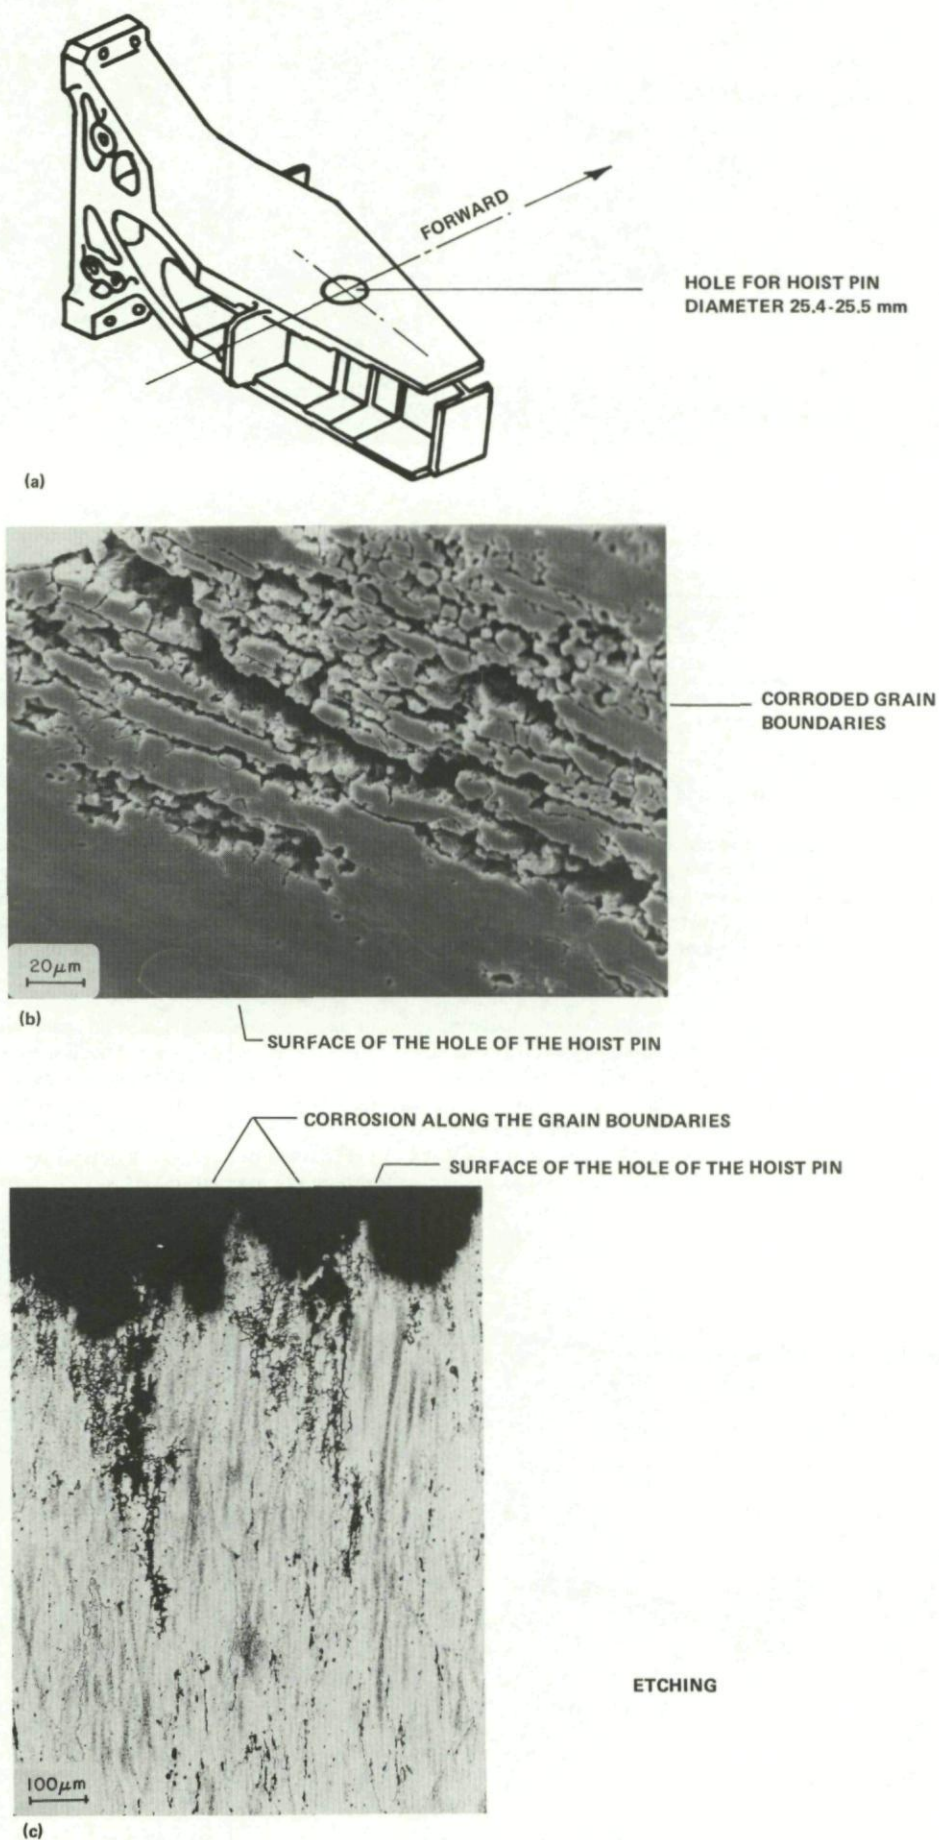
Intergranular corrosion of an Al-Zn-Mg-Cu alloy wing attachment forging
